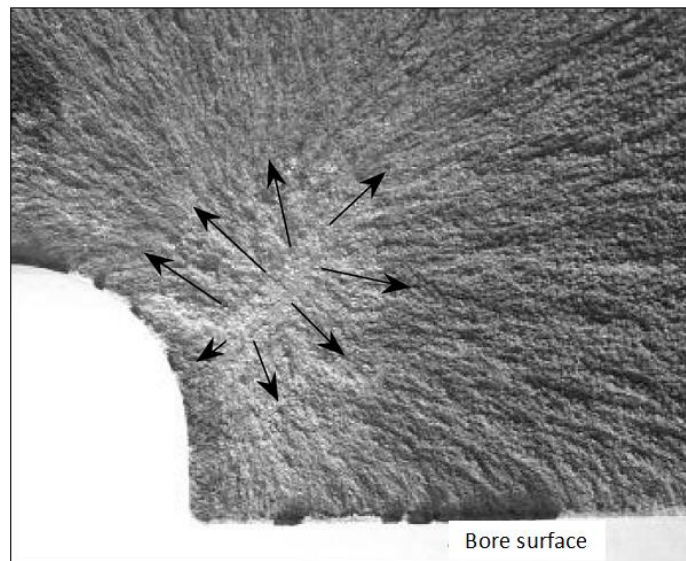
Fracture surface of a Ti-834 spin rig component
